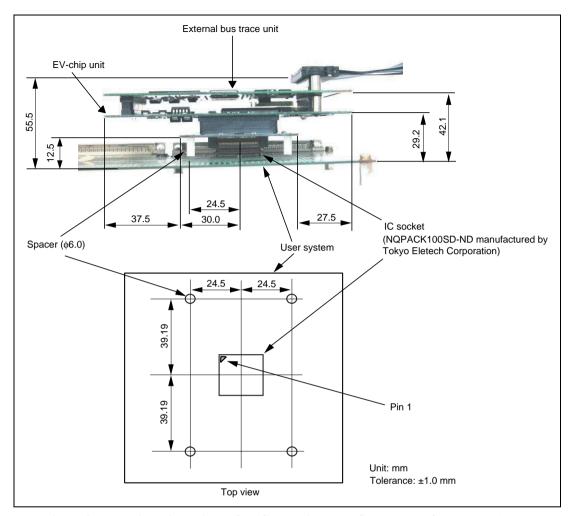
Resulting Dimensions after Connecting User System Interface Board (when Connecting External Bus Trace Unit and EV-Chip Unit)
